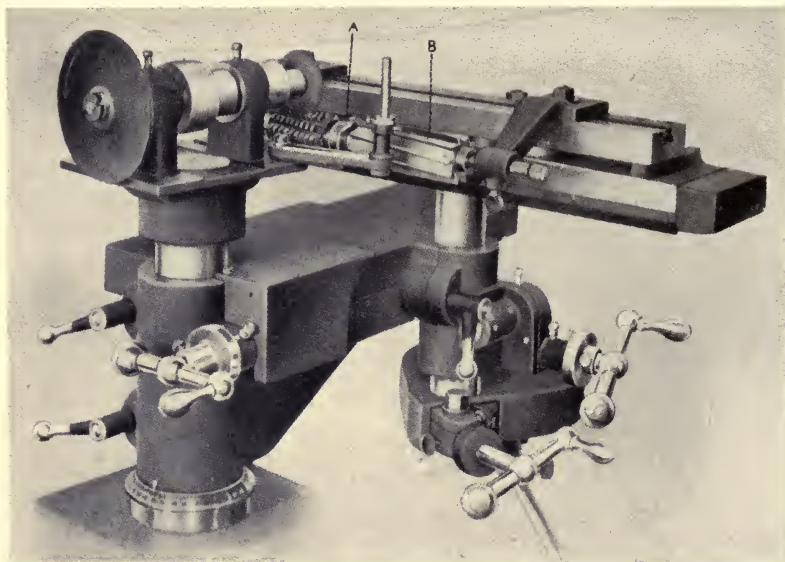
SHARPENING A SPIRAL HOB—CINCINNATI CUTTER GRINDER
